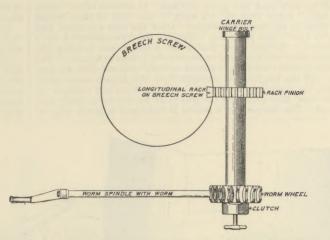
Apparatus for withdrawing and swinging Breech Screw of Heavy Gun.
